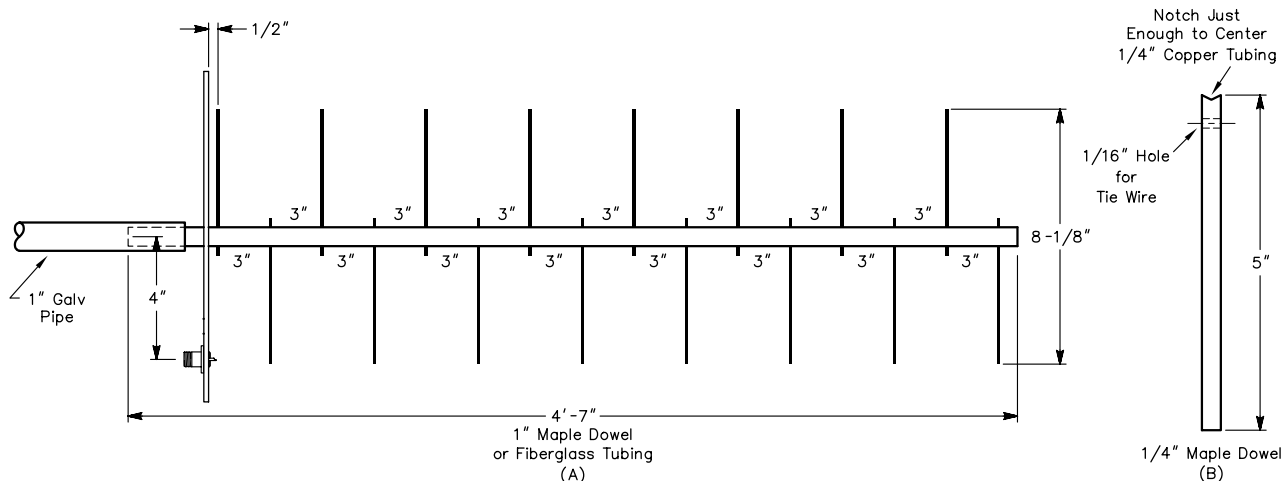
At A, the layout of the portable 435-MHz helix is shown. Spacing between the first 5-inch winding-support dowel and the ground plane is $\frac{1}{2}$ inch; all other dowels are spaced 3 inches apart. At B, the detail of notching the winding-support dowels to accept the tubing. As indicated, drill a $\frac{1}{16}$ -inch hole below the notch for a piece of small wire to hold the tubing in place.
